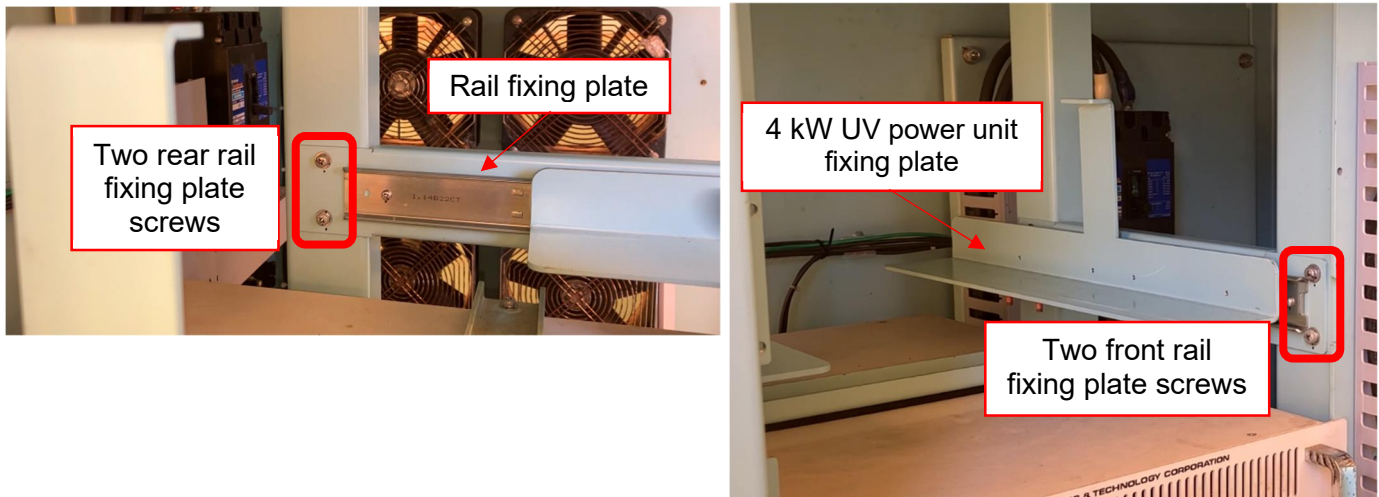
Removal of rail fixing plate and 4 kW UV power unit fixing plate
